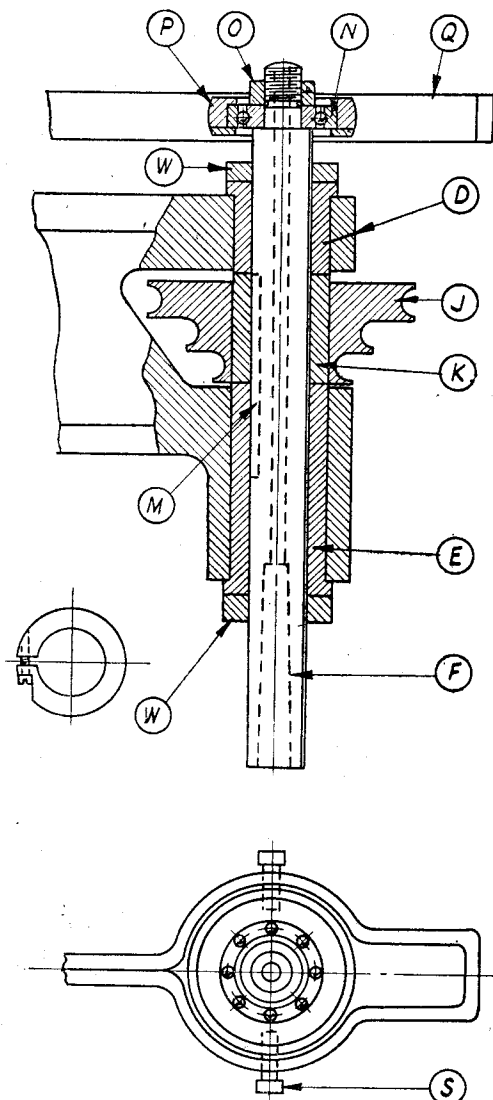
Sectional elevation through spindle, and plan, showing pivot pins
